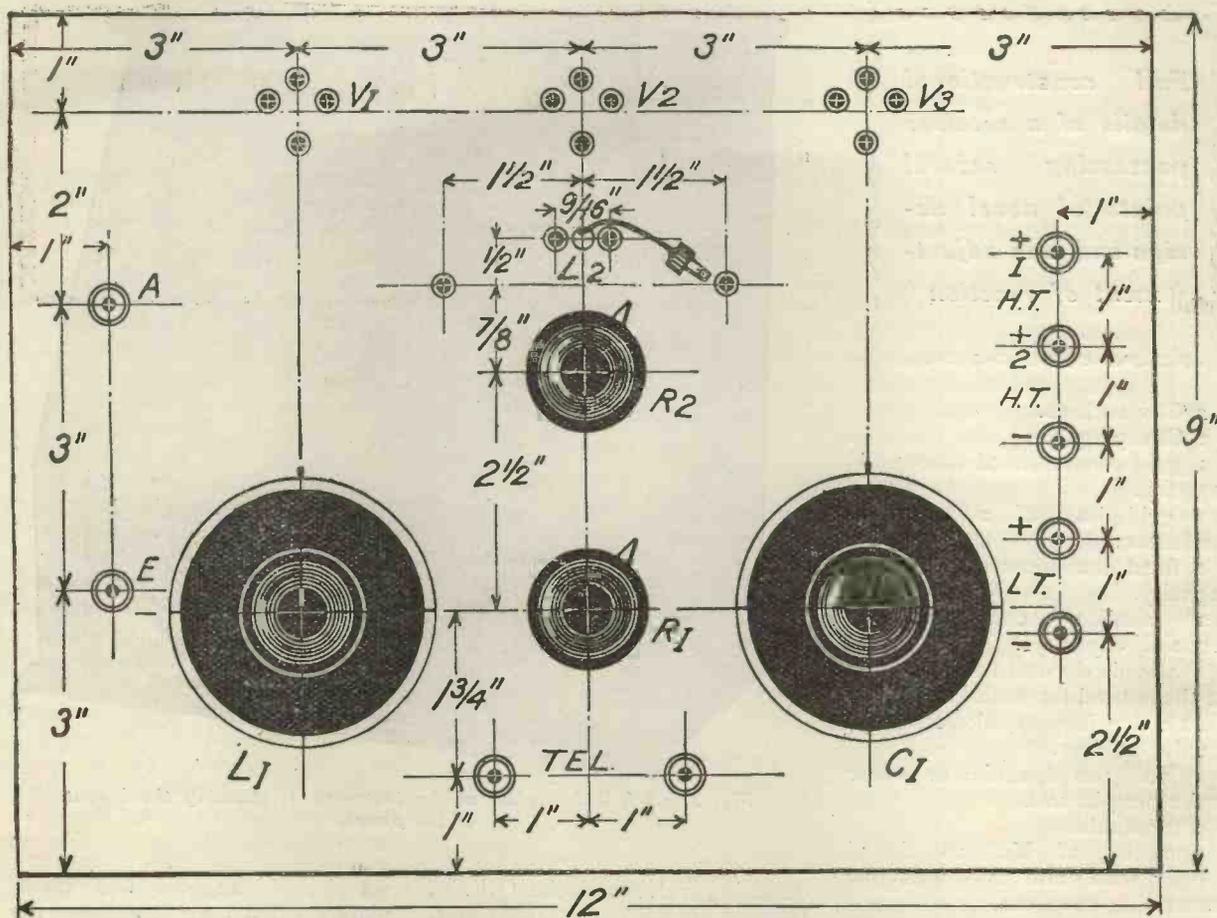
The layout of the panel, transformer and condenser drill holes being omitted, these being decided by the makes chosen. This figure is exactly half-size.
